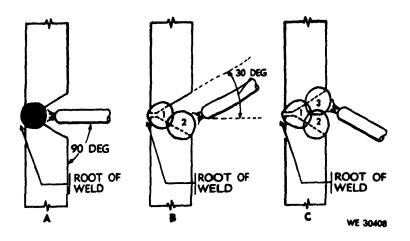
Welding butt joint in horizontal direction on vertical plates.
